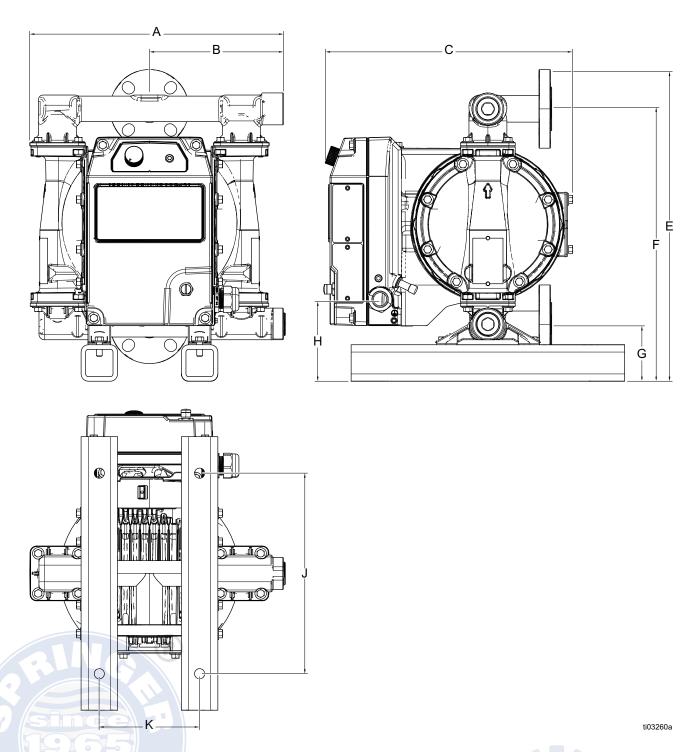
Dimension Diagram for i30 Model (QTC) with Metal Wetted Section, Center Flange (shown at rear)
